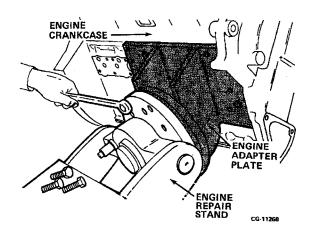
Attaching Engine Adapter Plate to Engine Repair Stand
